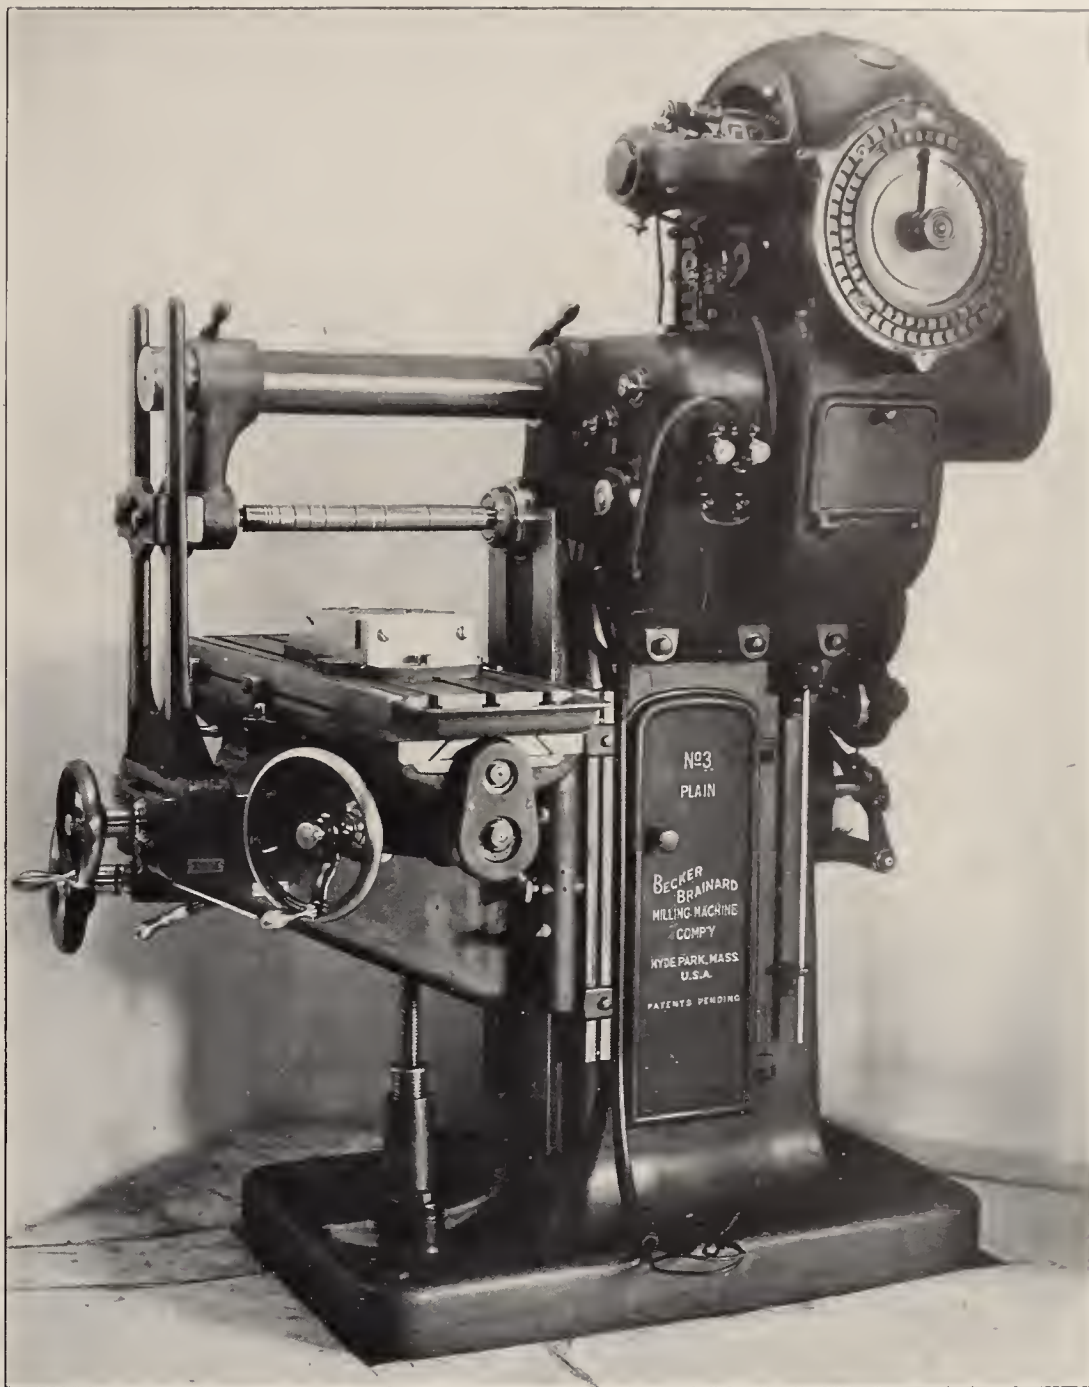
AN ELECTRICALLY-DRIVEN MILLING MACHINE BUILT BY THE BECKER-BRAINARD MILLING MACHINE COMPANY, HYDE PARK, MASS. SEE PAGE 241
